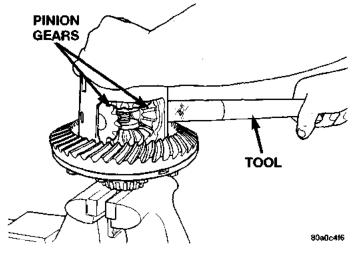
Pinion Gear Removal—Shown With 6963-A Holder
